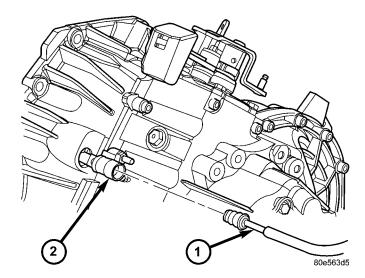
Clutch Slave Cylinder Hydraulic Connection
